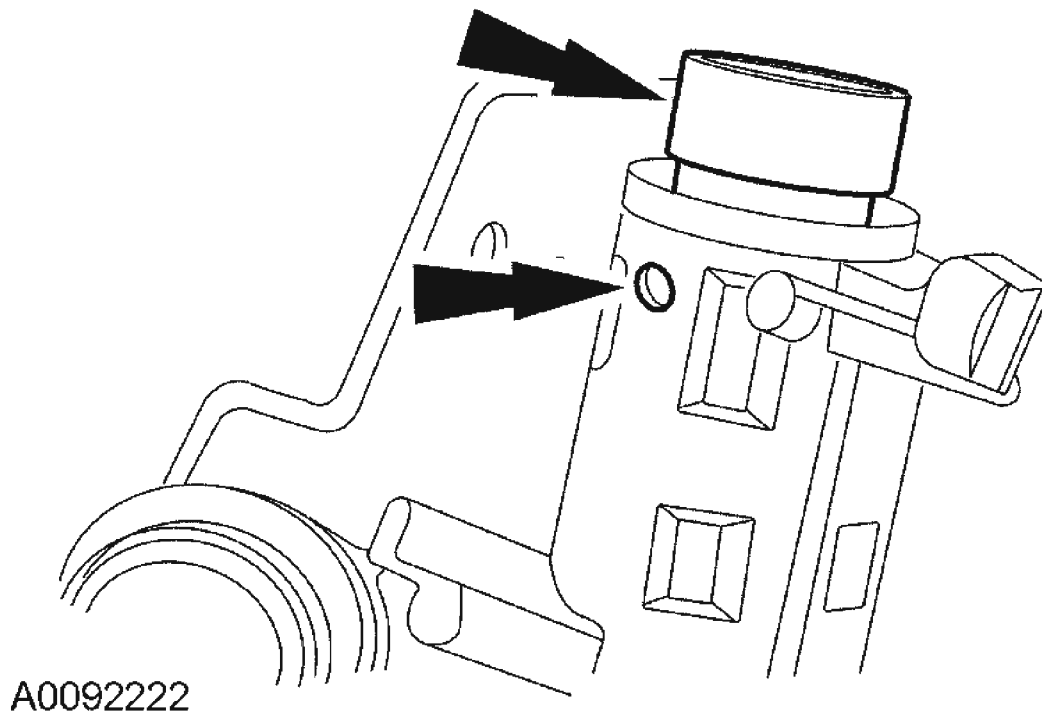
Rotating Ignition Lock Cylinder While Pressing Retainer Pin On Housing And Pulling Out
